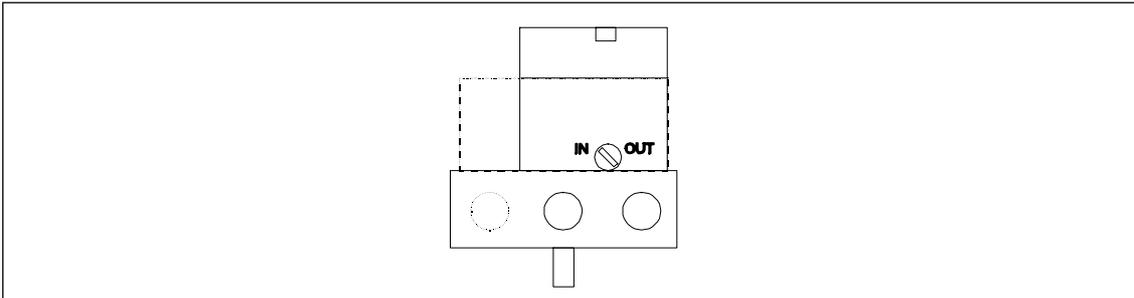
Purge air switch on the valve block, view of the positioner onto pneumatic connection side with cover open
